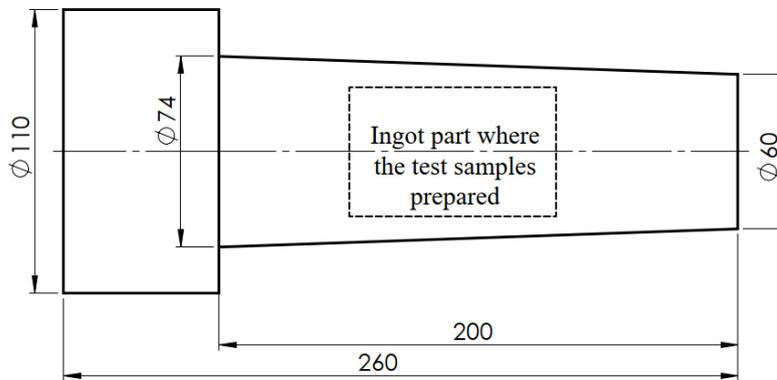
Technical drawing of alloy ingot and drilling test specimen (Dimensions in mm)
